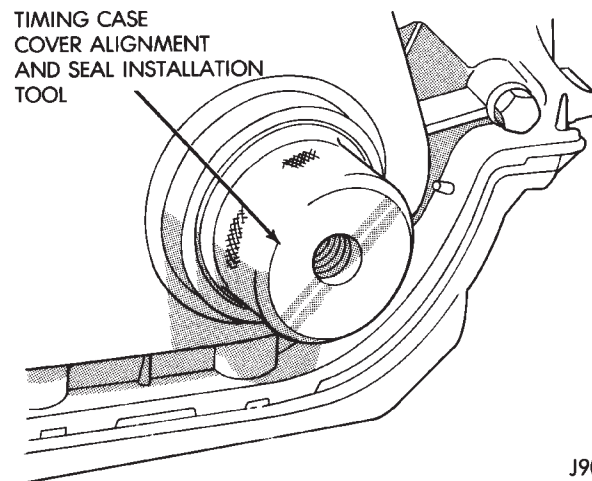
Timing Case Cover Alignment and Seal Installation Tool 6139
